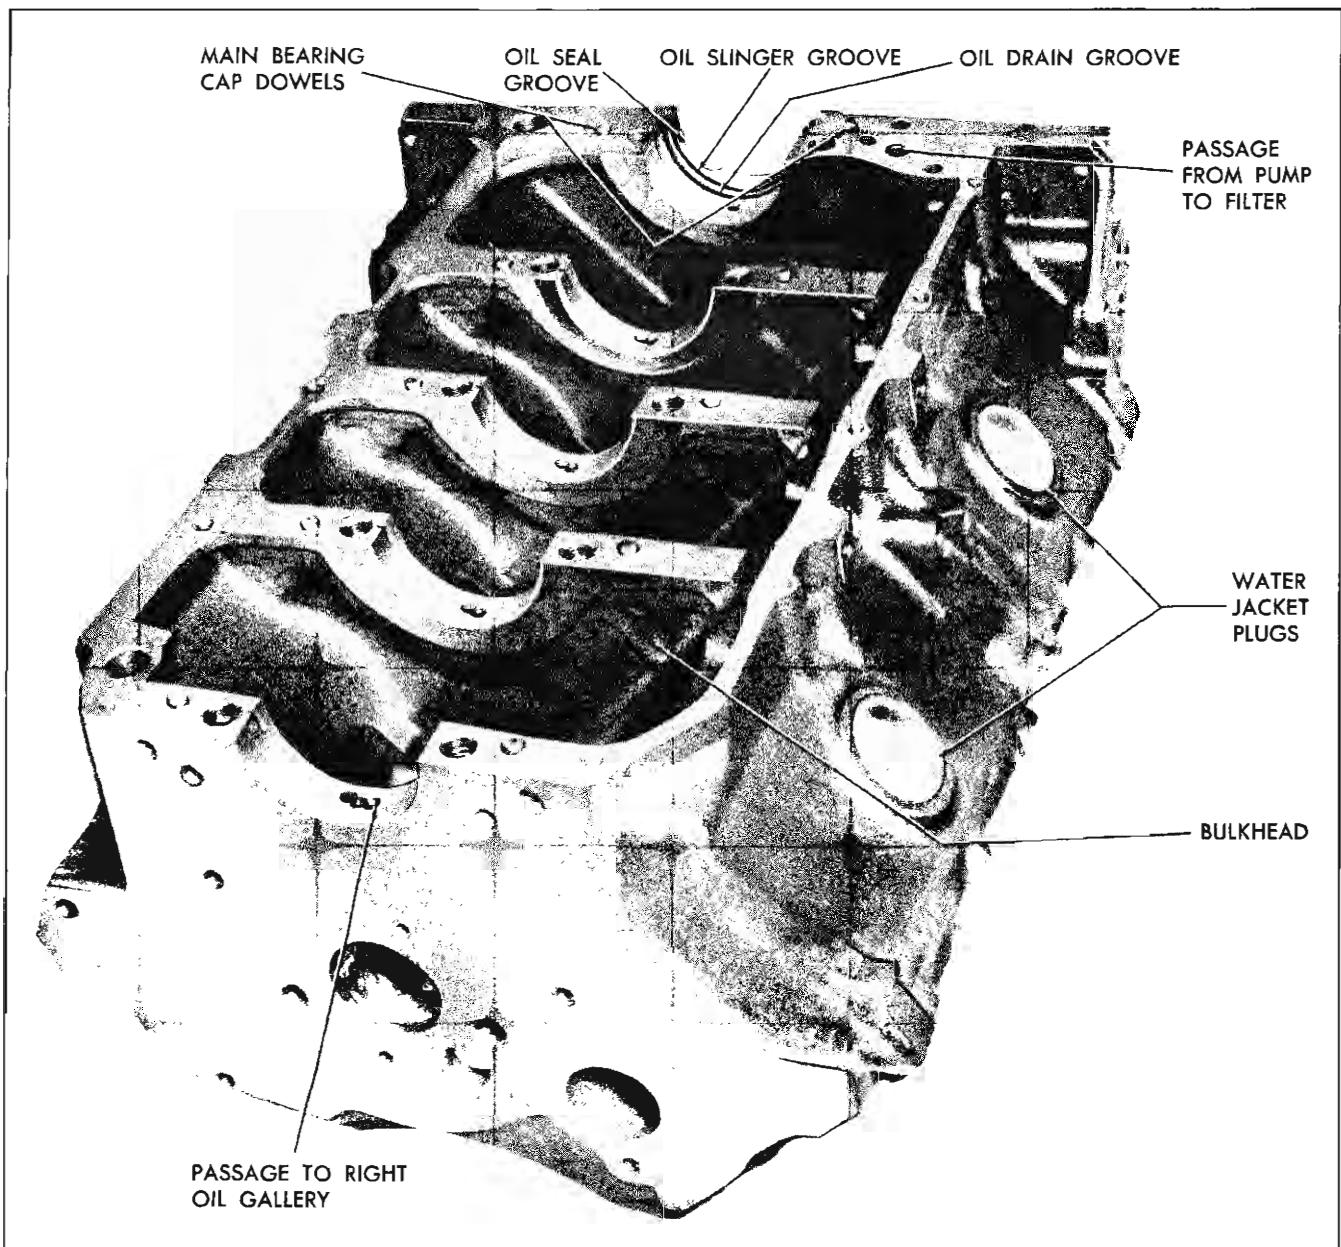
Cylinder Block—View from Bottom—4 Cylinder Engine
